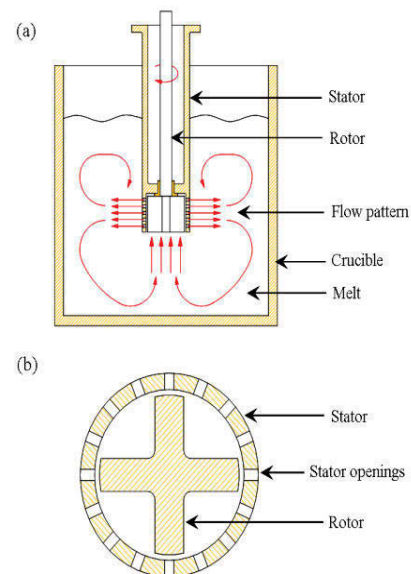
The new rotor-stator high shear device for conditioning of liquid melts by application of intensive melt shearing, (a) inside a crucible of melt illustrating the macroscopic flow pattern and (b) bottom view of the high shear device.
